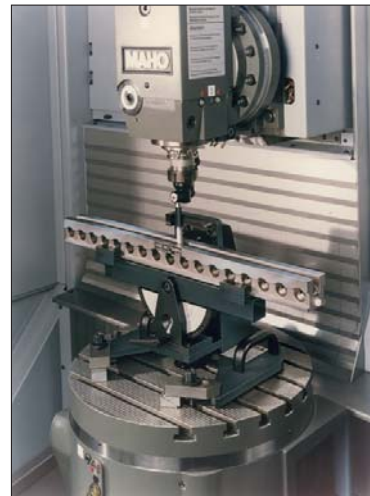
KOBA-step, shown here horizontally aligned along the X-axis of the rotary bed of a machine tool equipped with a dimensional-gauging head.
